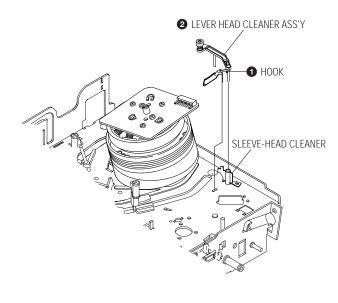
Lever Head Cleaner Ass'y Removal
